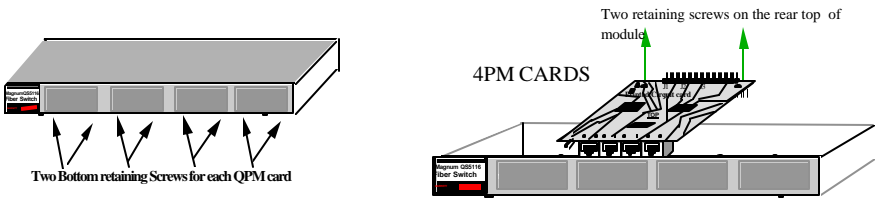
Front View - Face Plate & 4PM Retaining Screws
